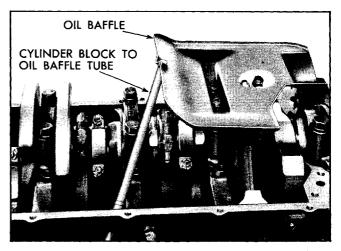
Proper Assembly of Oil Baffle and Tube
